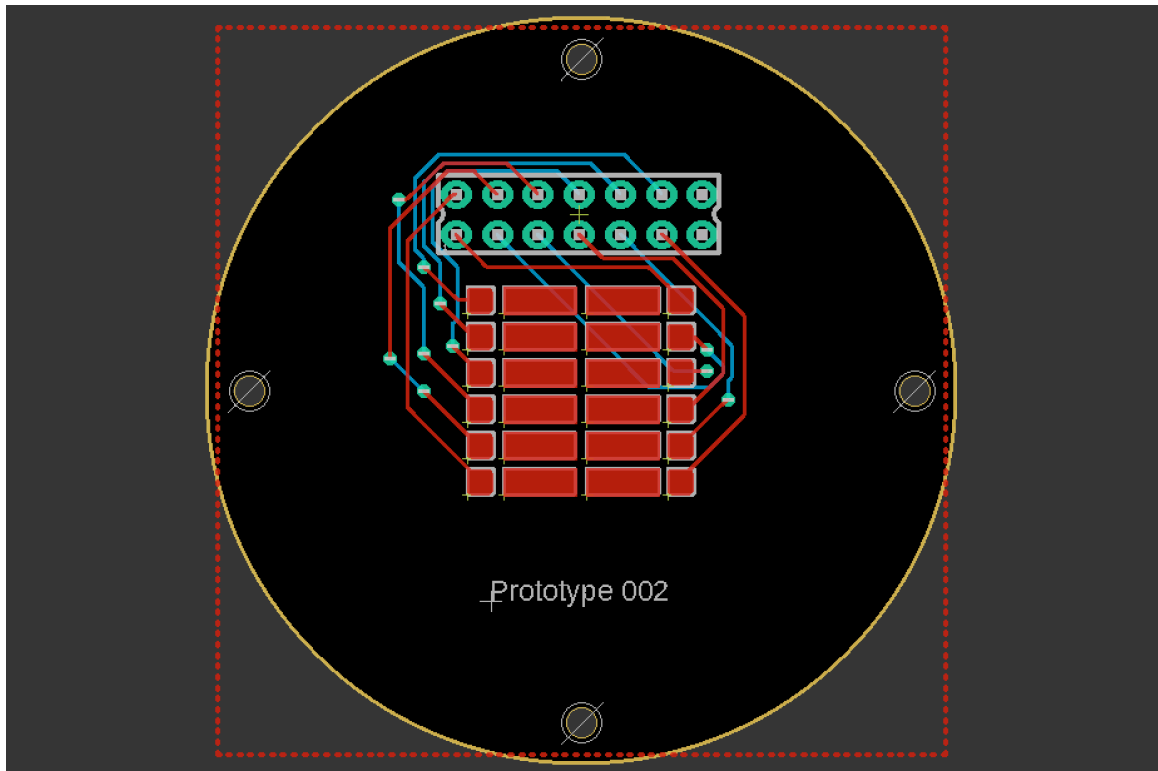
The outlay of the printed circuit board for the EDMR sample holder.
